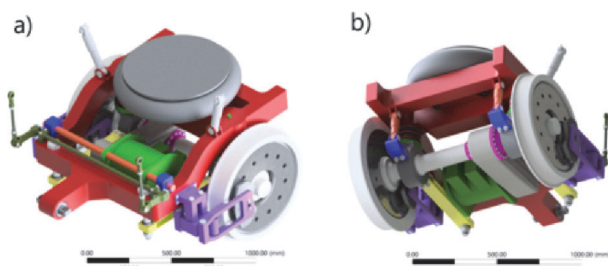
Single-axle rail bogie: a) front view, b) bottom-view
